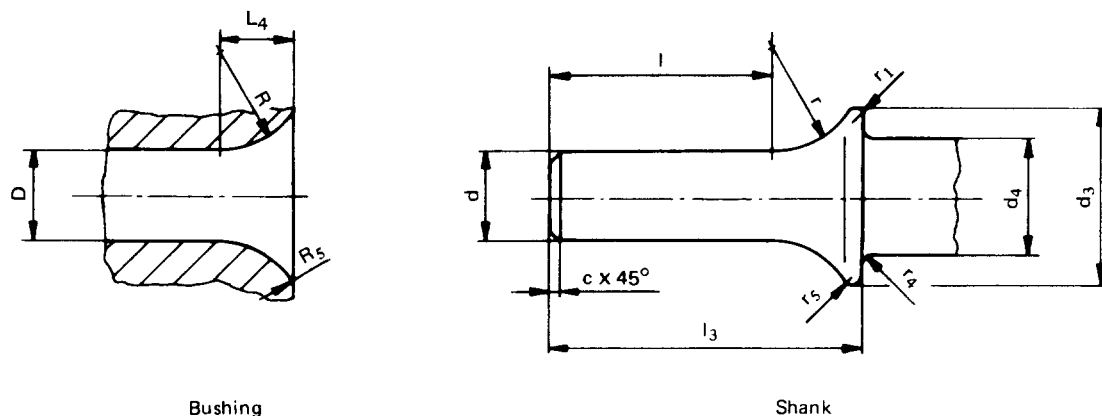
Light rivet snap shanks and chuck-bushings, tapered
